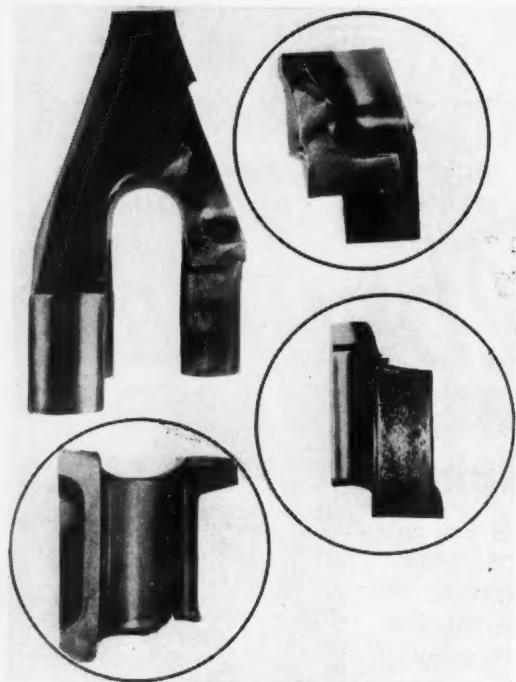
Illustrated here is a machine part which failed due to fatigue induced by excessive heat and stress, probably caused by a high spot in one or both surfaces.
